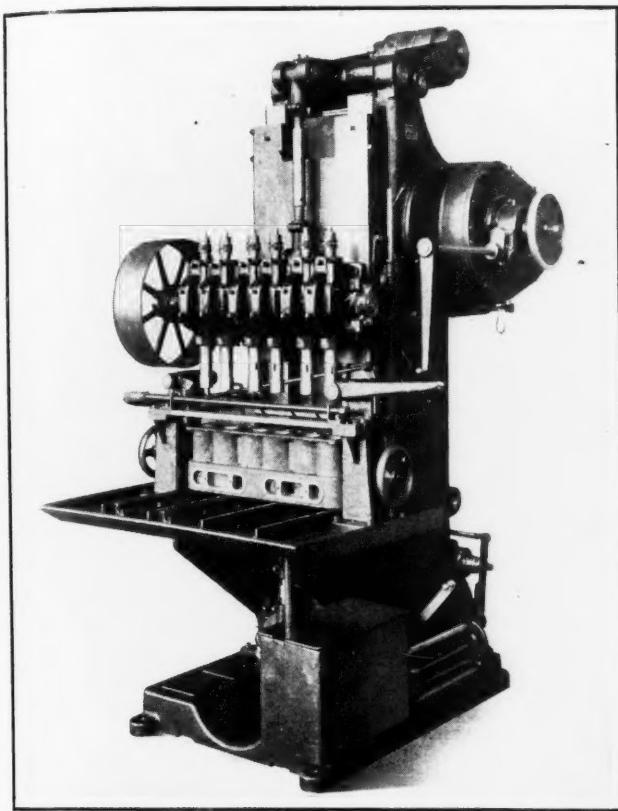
Multiple-spindle Cylinder Lapping Machine equipped with Jig
